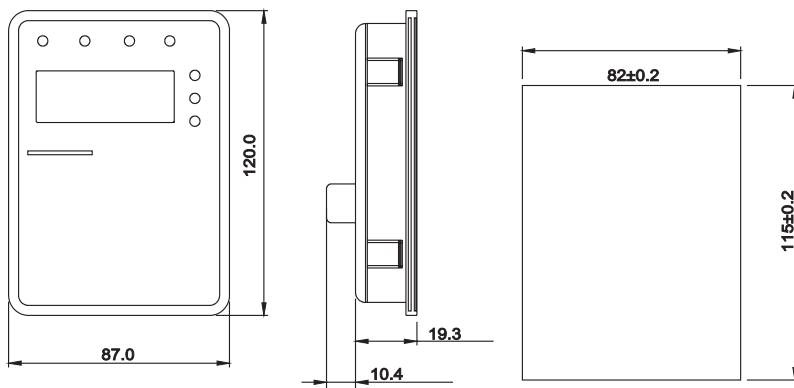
Dimension of big keypad      Figure A-12 Installation of big keypad
